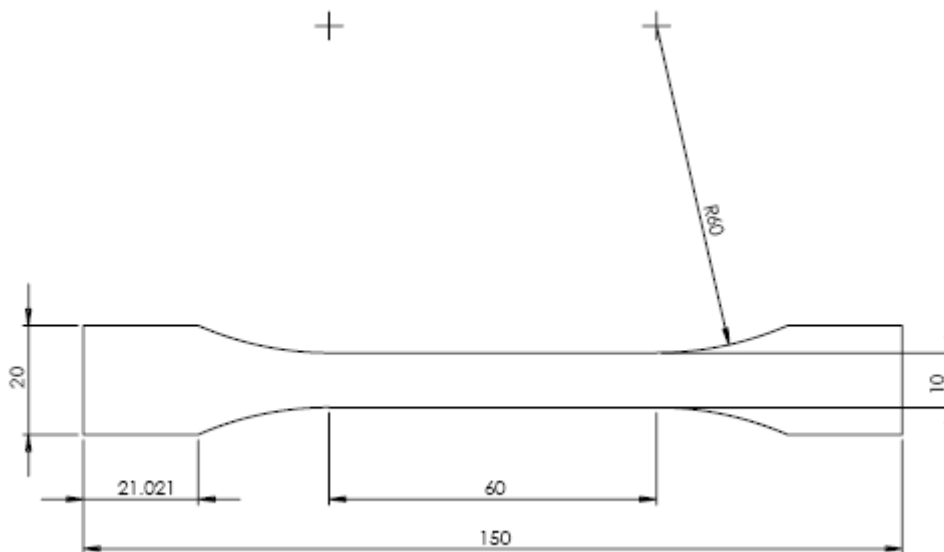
Tensile specimen – Type I in accordance to ASTM D638M-93 [103].
